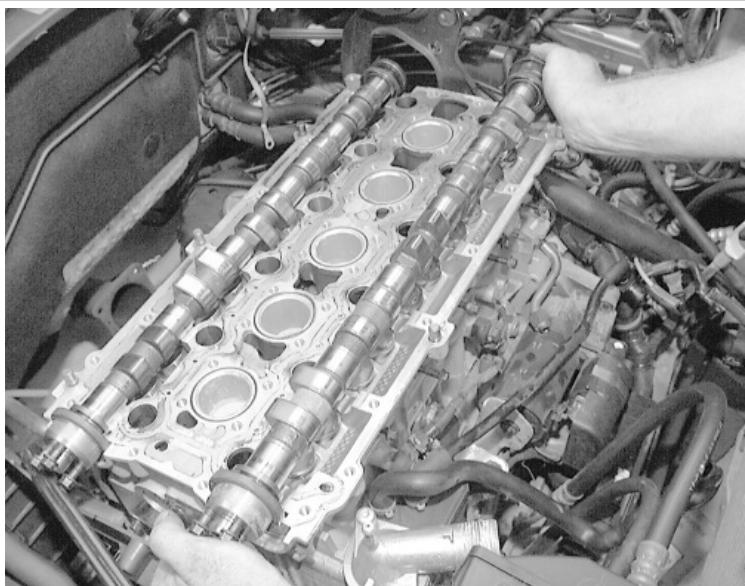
Carefully lift the intake camshaft from the cylinder head
